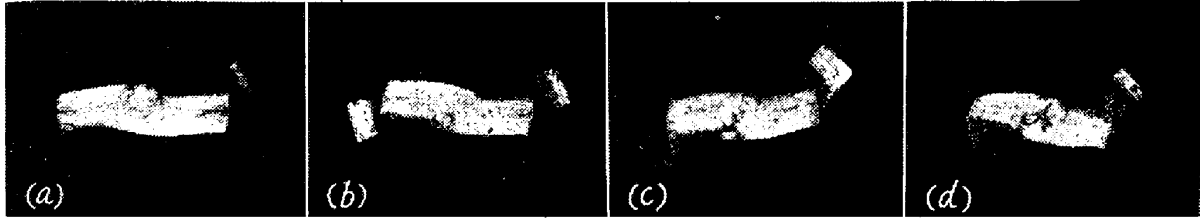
Types of fractured surface of a torsion test piece.(3/5)
